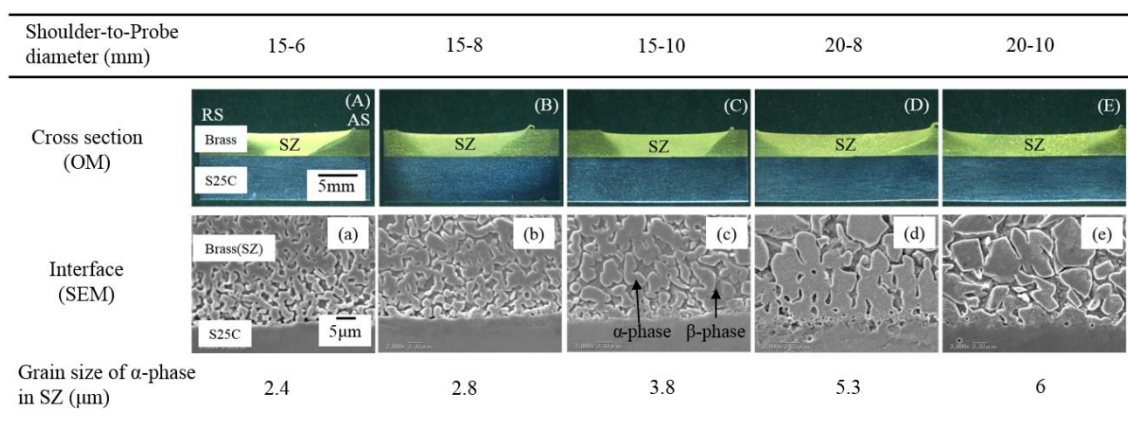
Cross-sections and interface microstructures of the lap joints with different tool dimensions at constant welding parameters of 500 mm/min and 1000 rpm.
